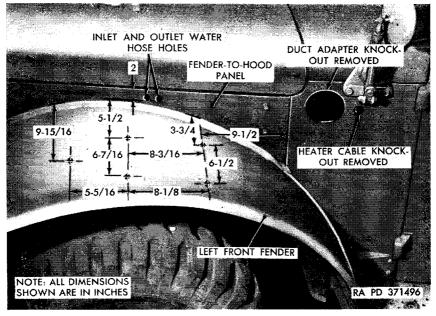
Dimensions for locating heater mounting holes on left front fender.
